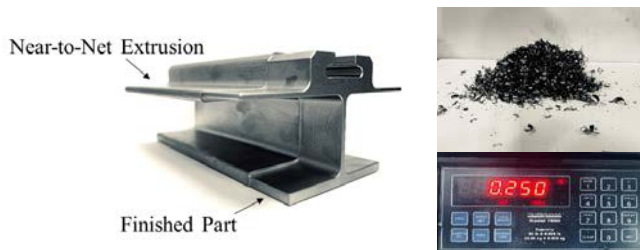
A finished part (20mm long) was machined out of a near-to-net extrusion using the in-house equipment, which resulted in approximately 0.1kg of machined waste.
